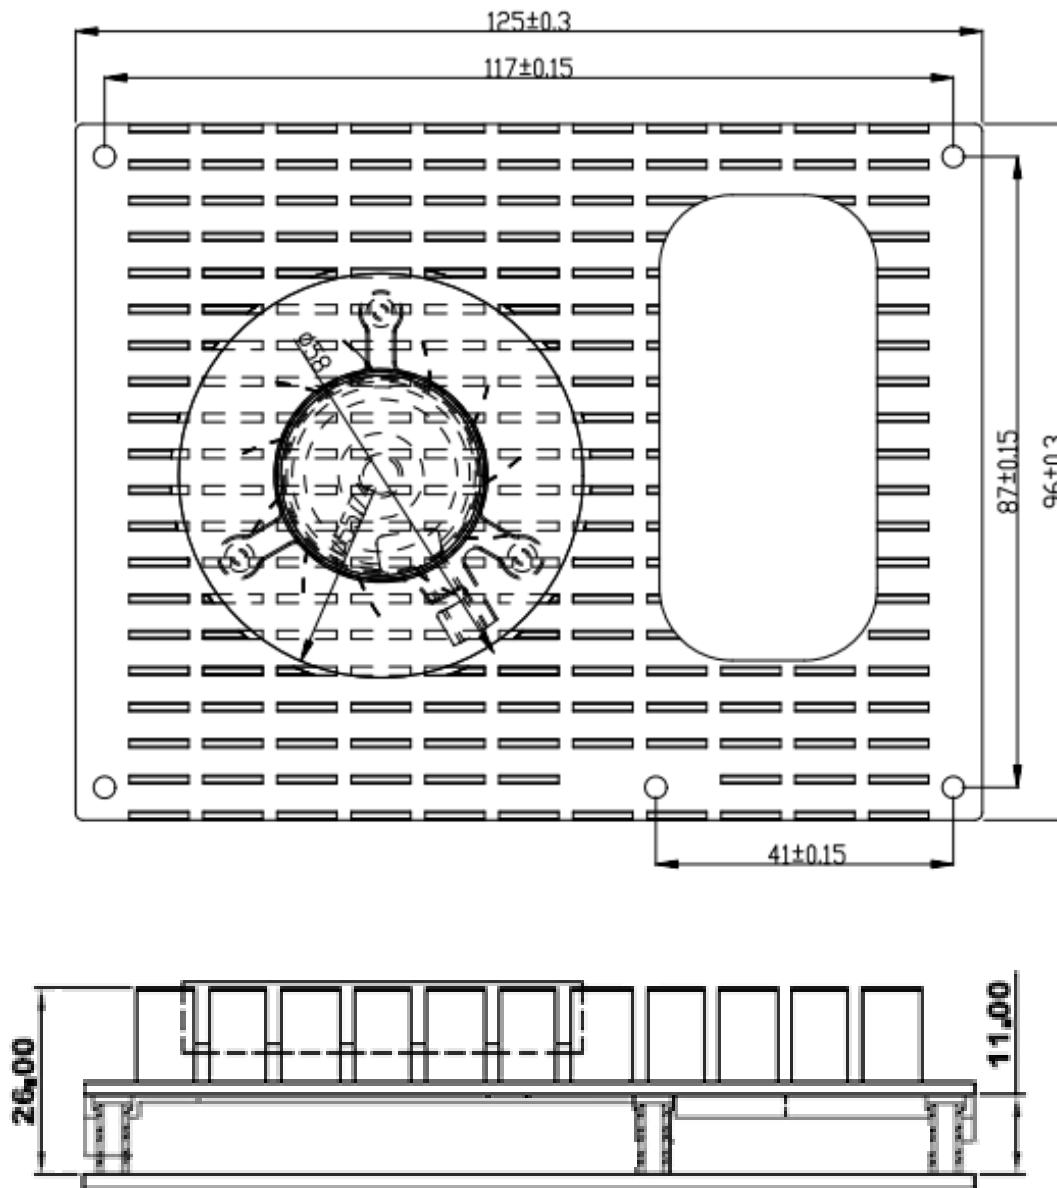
ICE-QM770 with Heatspreader Plate and Cooler Kit Dimensions (mm)
